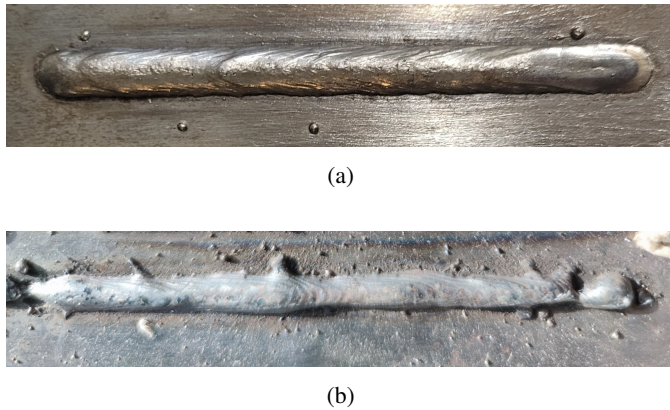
Weld images from the database: (a) acceptable welds and (b) unacceptable welds
